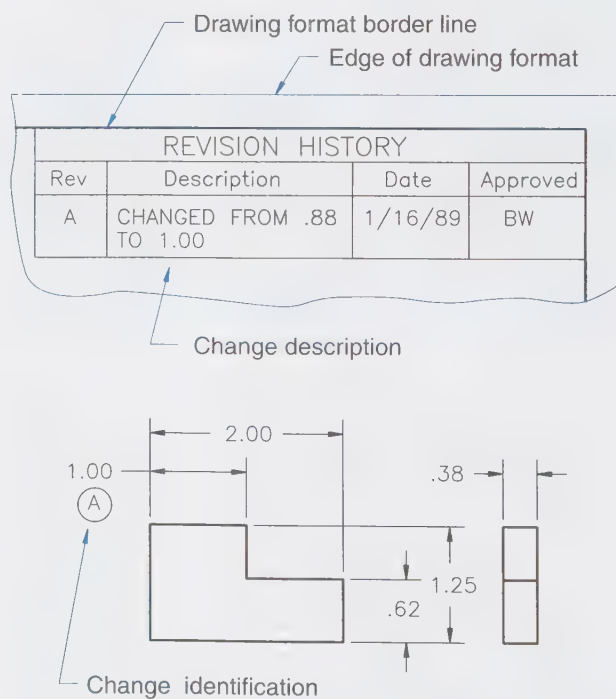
A drawing revision is normally identified where it is made and then explained in the revision history block.
